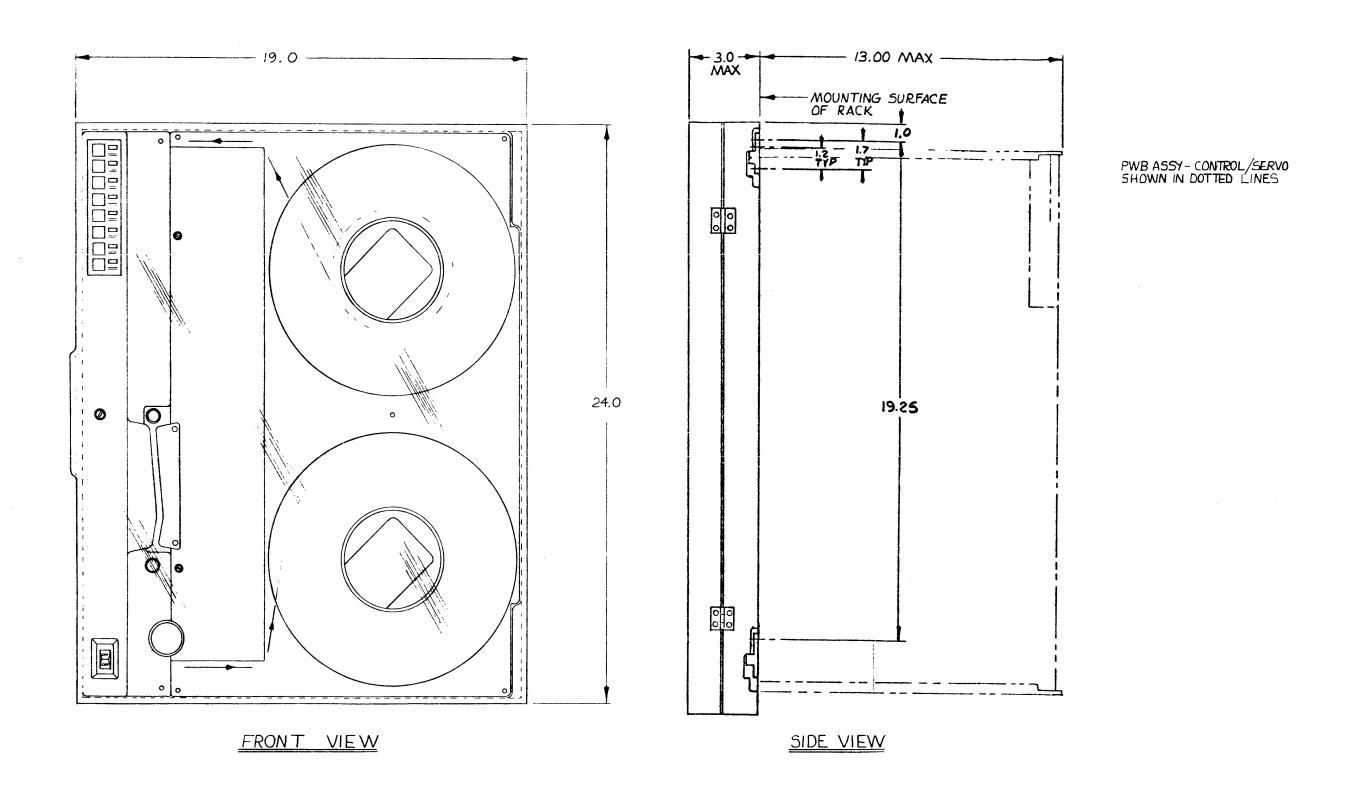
Model 900X Outline Dimensions (Sheet 1)
